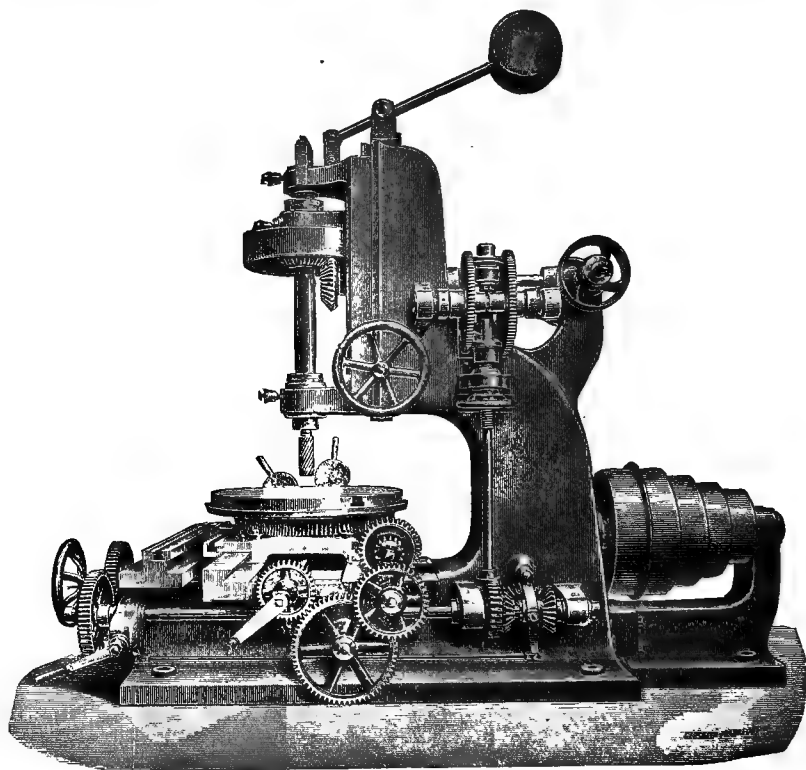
Large vertical milling machine. Fetu, Defize & Co.
